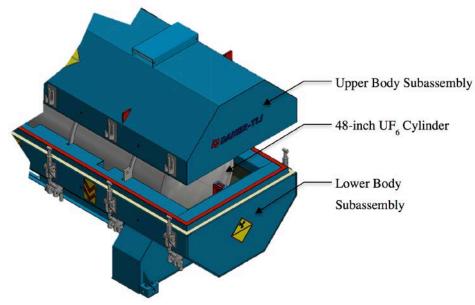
Kevil Kougar Overpack Upper and Lower Subassemblies and a Sample 48-inch  $UF_6$  Cylinder.
